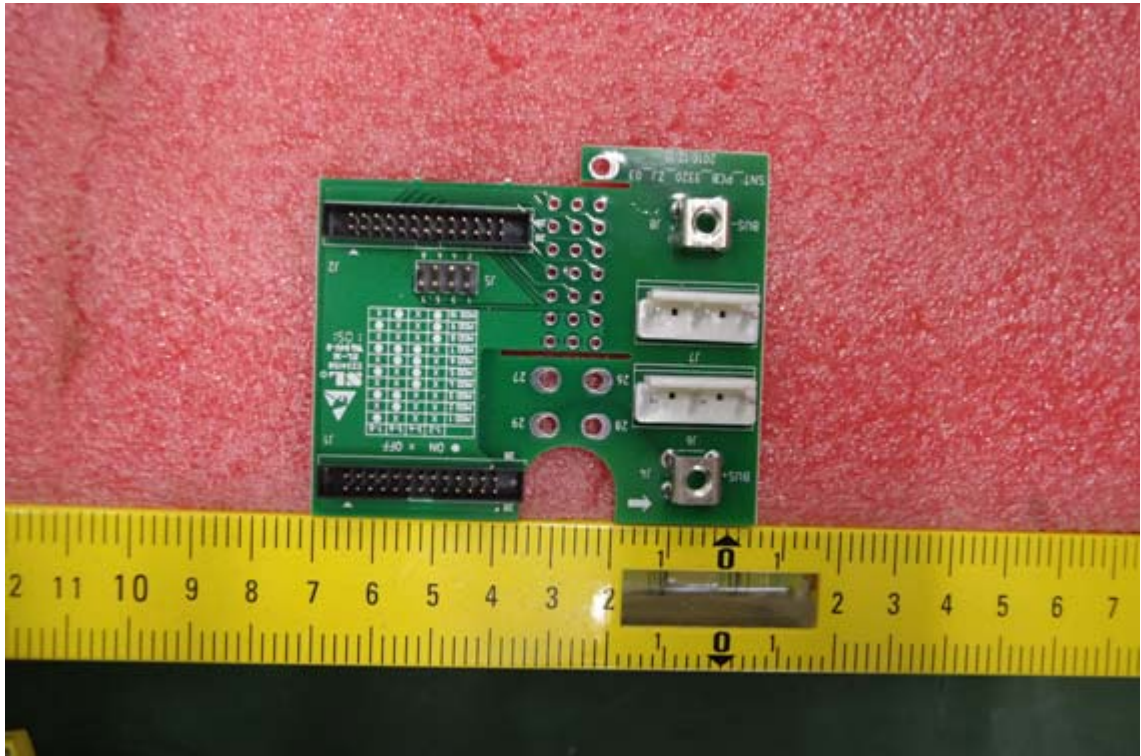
Board SNT_PCB_3320_ZJ, component side view
